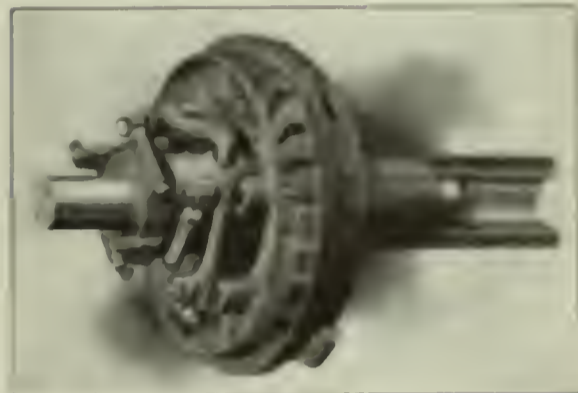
PART FRONT VIEW OF DODGE CLUTCH, SHOWING CONTACT BLOCKS
